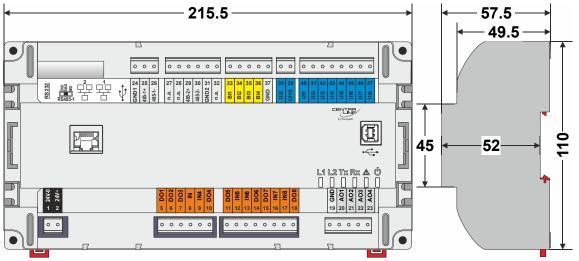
EAGLEHAWK NX controller (w/o HMI but with RJ45 socket for connection of portable HMI, and with full complement of onboard I/Os), dimensions (in mm)
